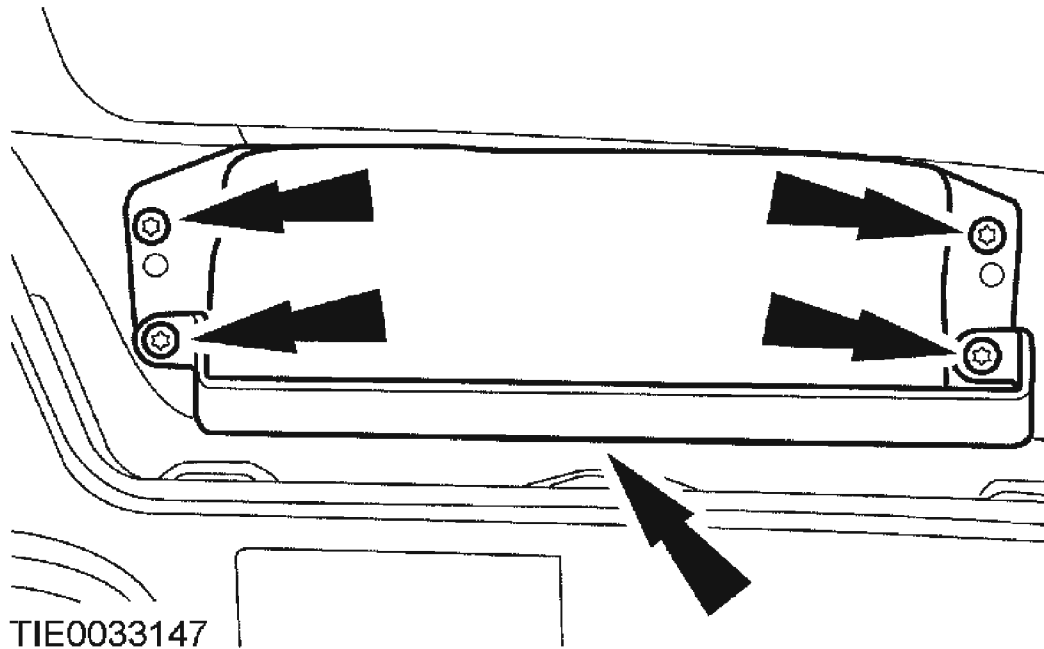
Detaching Passenger Air Bag Module And Reinforcement Bracket From Instrument Panel
